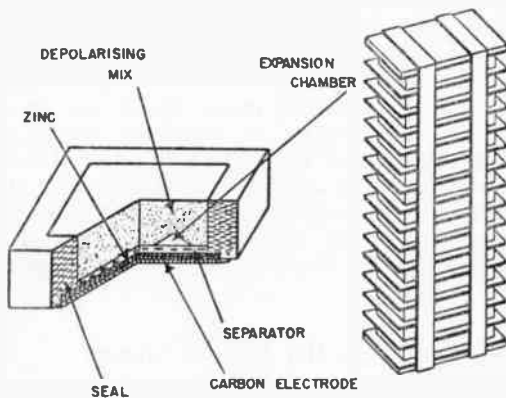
Structure of flat-cell, and flat-cell assembly.
